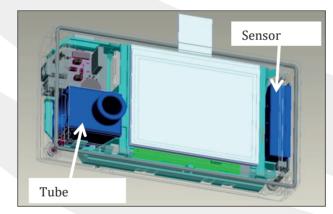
Referent used parts Sensor Cover and Tube (Courtesy of BELIT)
